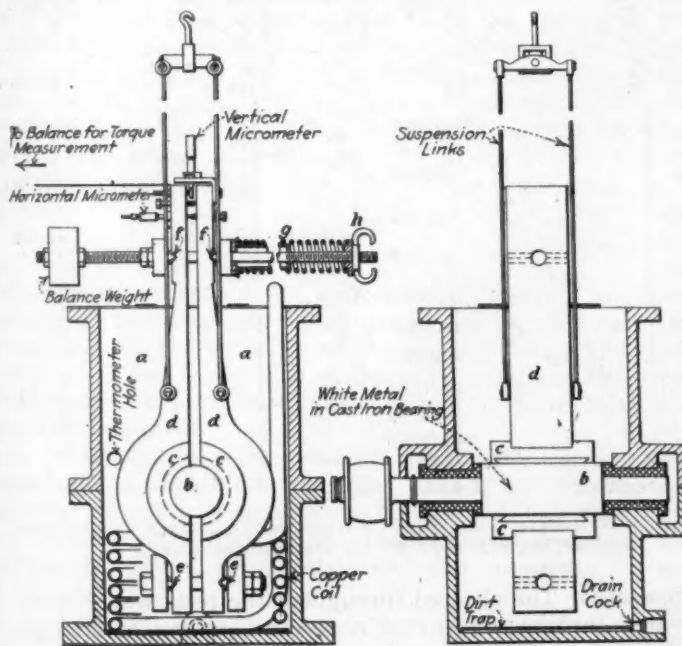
FRONT AND SIDE ELEVATIONS OF A MACHINE DEVELOPED IN ENGLAND TO MEASURE THE THICKNESS AND RESISTANCE OF OIL-FILMS IN HIGH-SPEED BEARINGS
